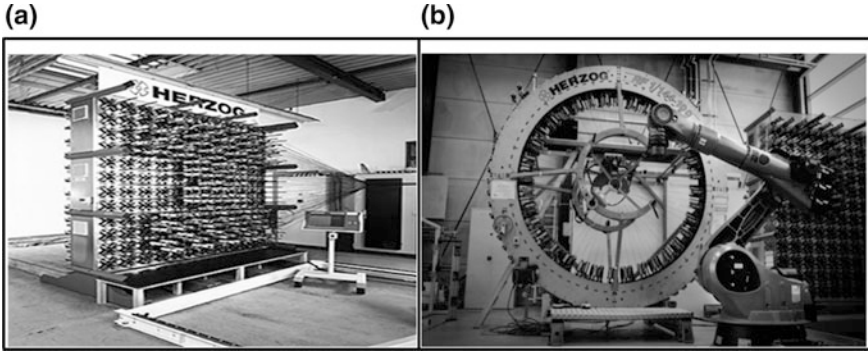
a 3D flat. b 3D circular axial braiding machines [85, 91]
